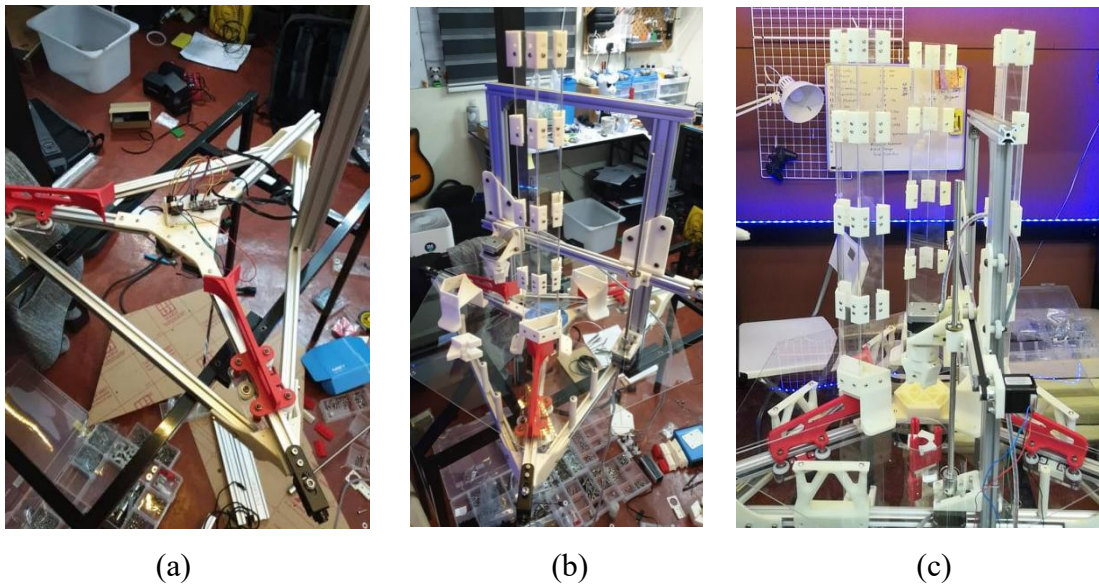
(a) Initial, (b) Second, and (c) Final Stage of Prototype
